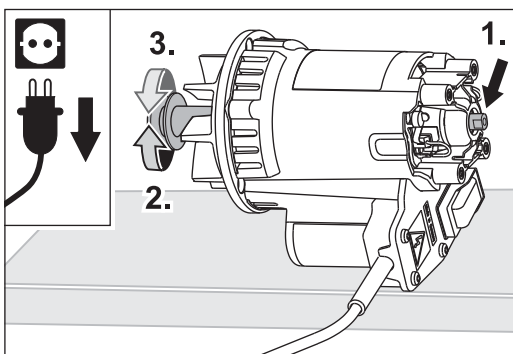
Hold the end of the motor shaft with a spanner (1.) and unscrew the motor pulley from the shaft (2.). Screw on the new motor pulley (3.).
